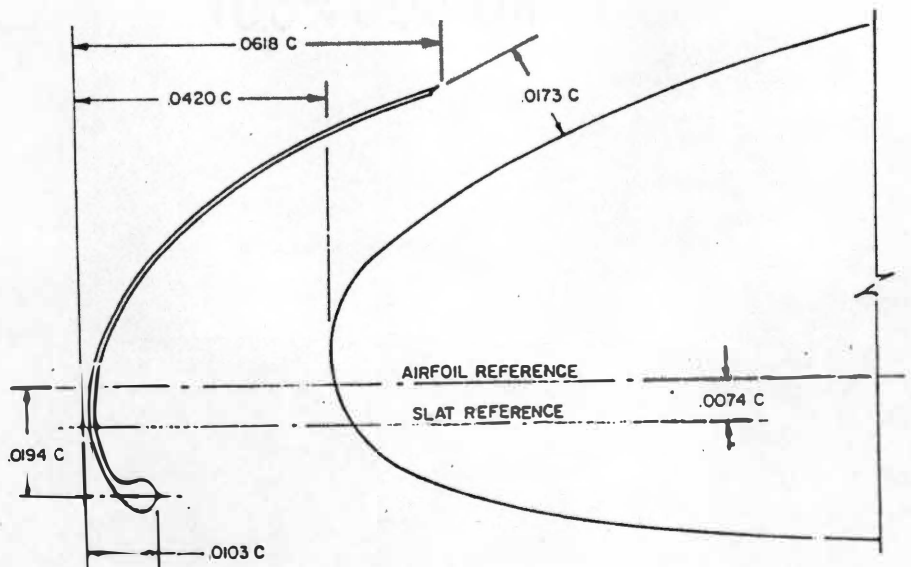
Thin Fixed Slat Design for the Rockwell/Ayres S-2R Wing Section
